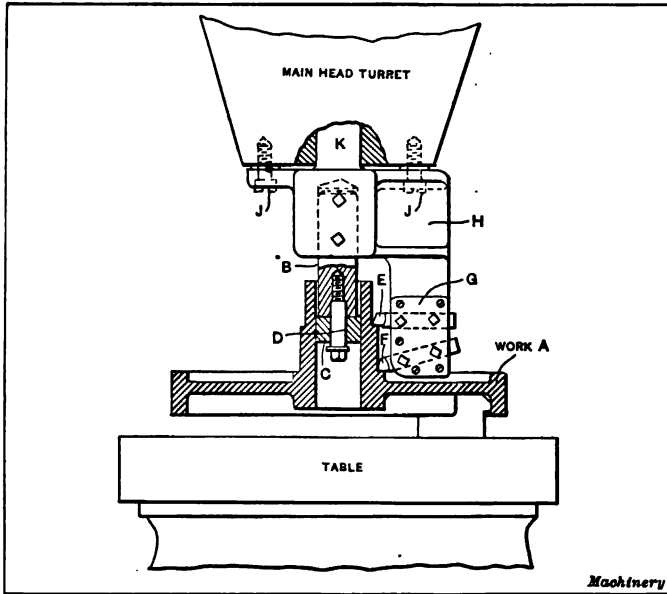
Multiple Turning Tool for Vertical Turret Lathe
